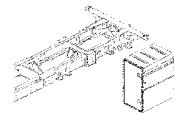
Connection of frame with the cross girder behind axle final drive
